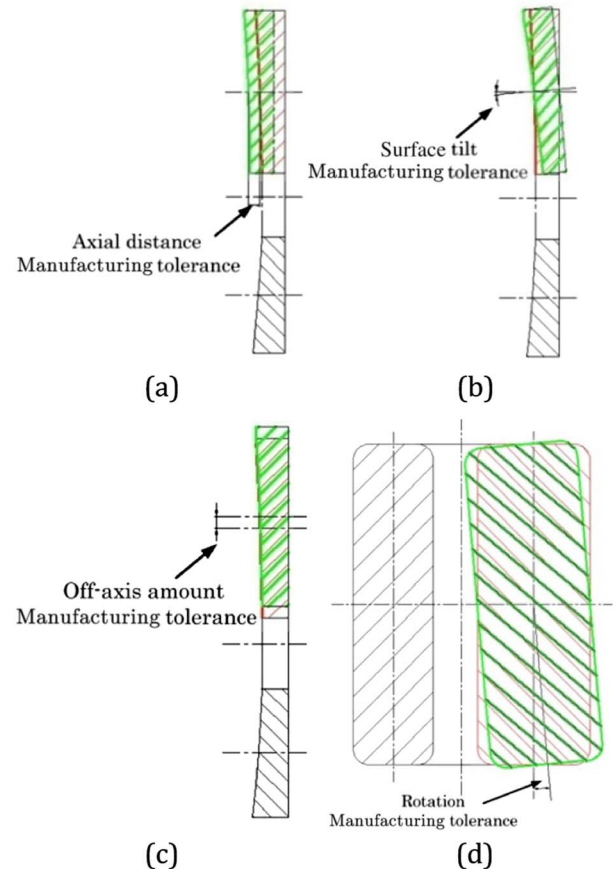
Diagram showing integration manufacturing tolerances. (a) Axial distance manufacturing tolerance. (b) Surface tilt manufacturing tolerance. (c) Off-axis amount manufacturing tolerance. (d) Rotation manufacturing tolerance.
